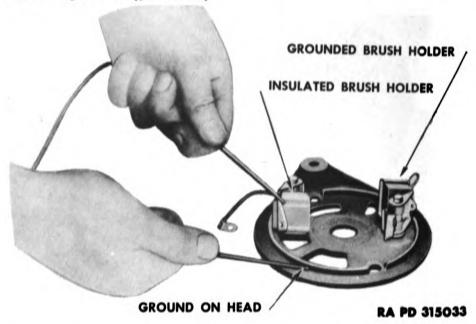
Testing Insulated Brush Holder for Grounds with Test Probes
